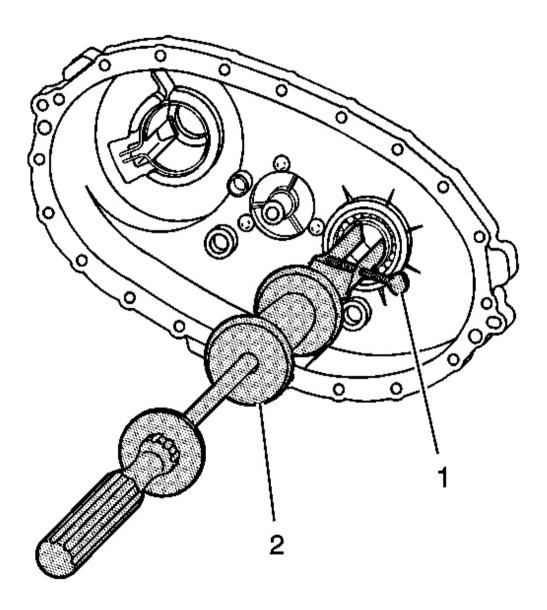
Using J 26941 & J 23907 To Remove Rear Bearing For Front Output Shaft From Rear Case Courtesy of GENERAL MOTORS CORP.
